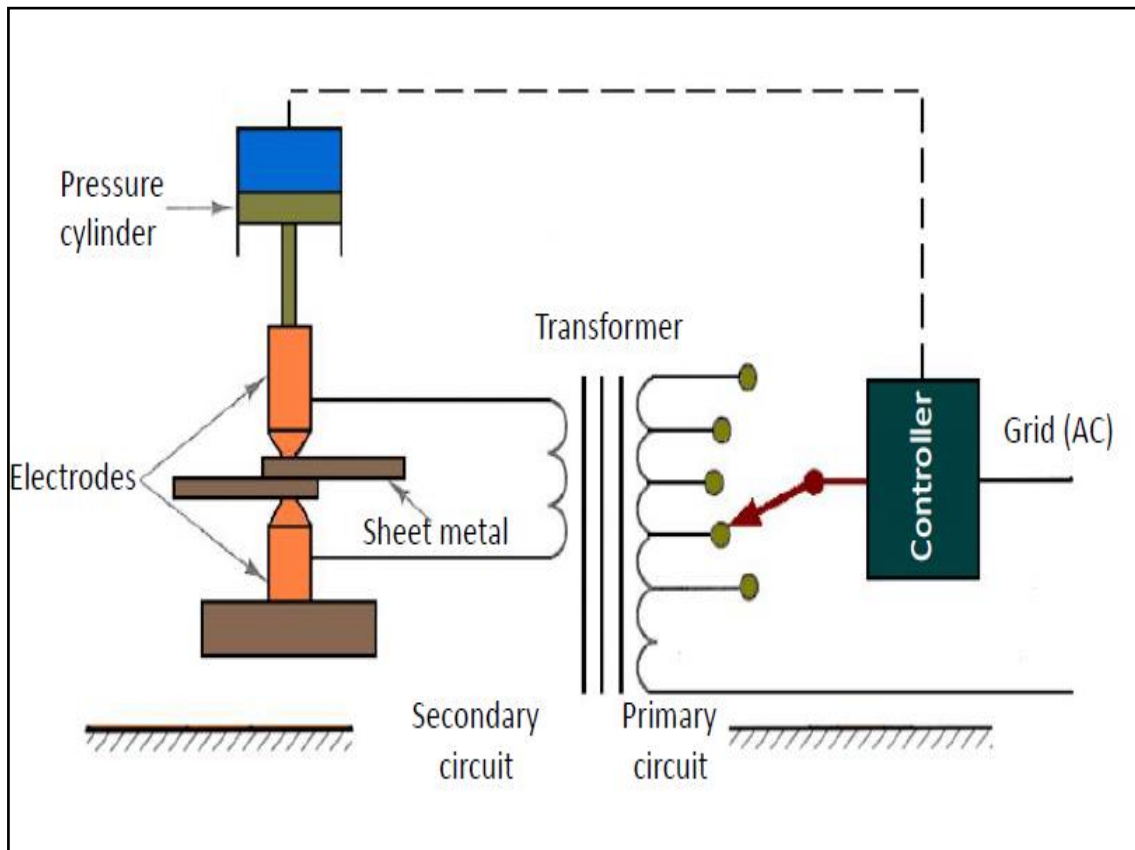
Schematic view of resistance spot welding machine
